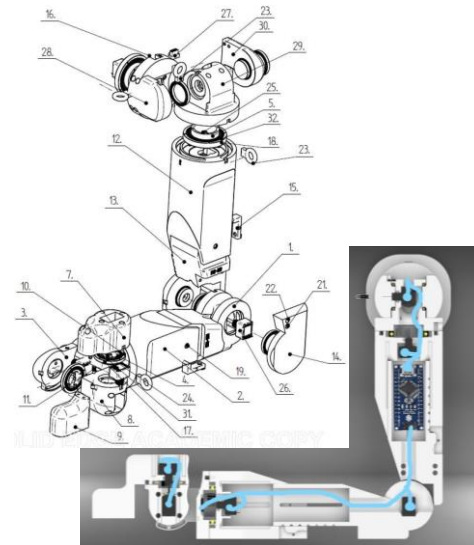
Exploded 3D assembly drawing of the dummy upper limb (left-up); cross-sectional view of the dummy upper limb with the sensor data processing microcontroller board (right-bottom)
